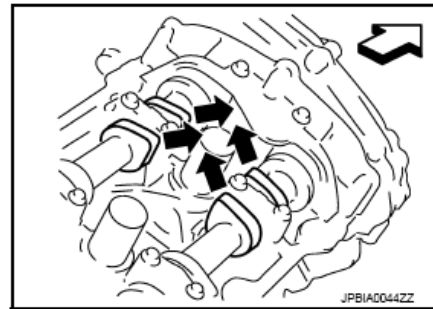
Identifying Intake And Exhaust Cam Nose Position
